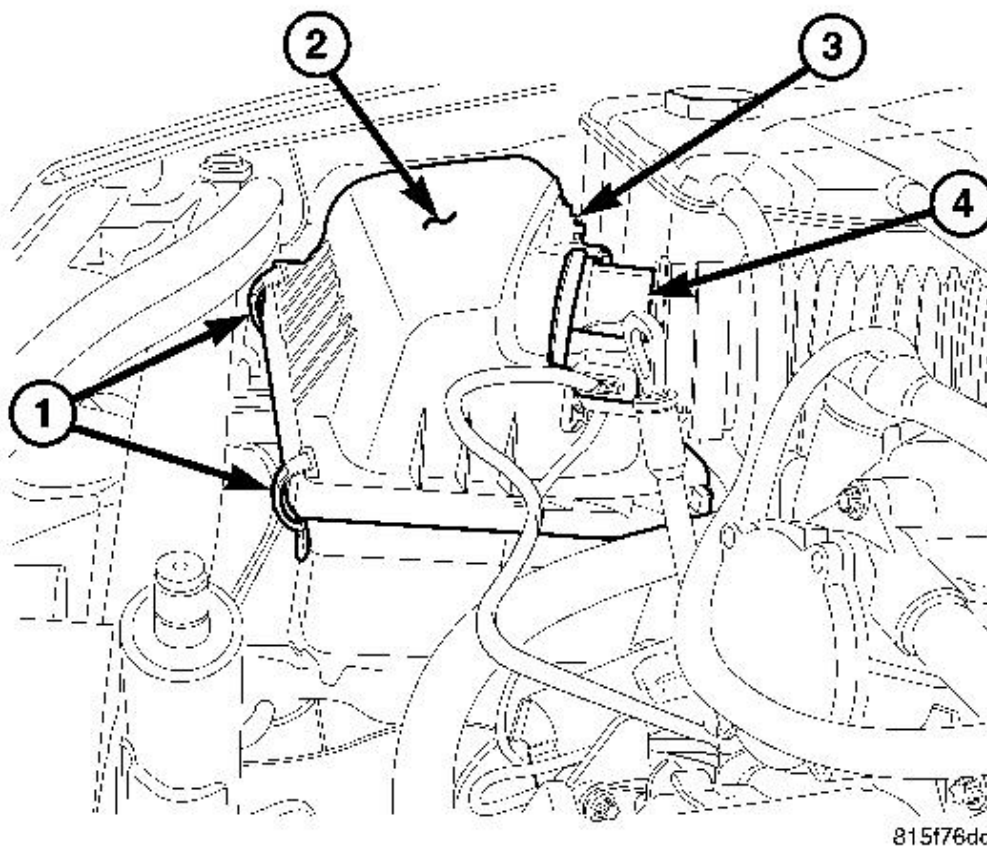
Air Cleaner Cover And ComponentsCourtesy of CHRYSLER LLC
